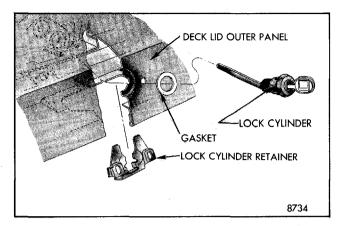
Lock Cylinder and Retainer Cadillac K Style
